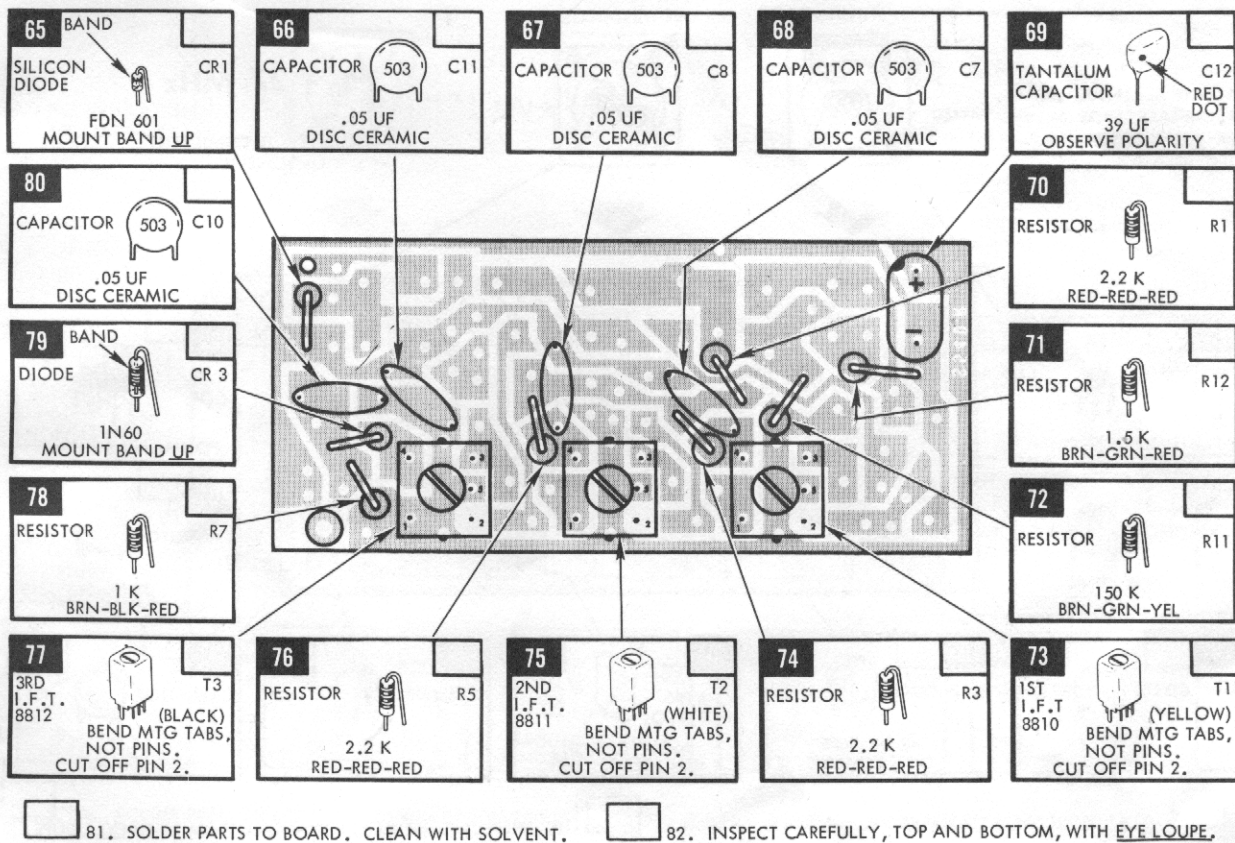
Basic Receiver Assembly (Sheet 1 of 2)
